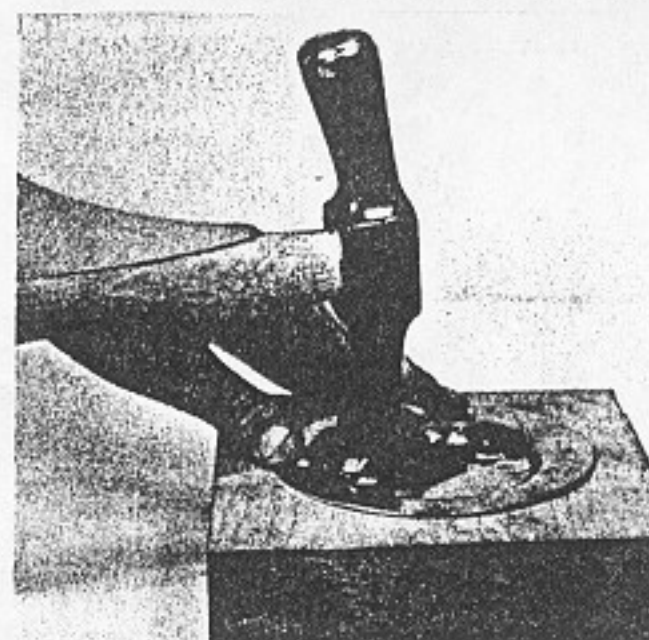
The wooden forming block can be used when several pieces of the same shape and size are to be made.
